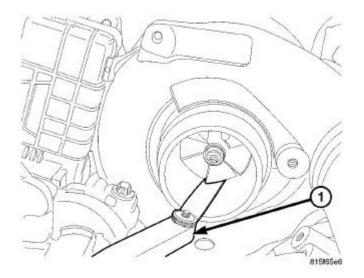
Measuring Turbocharger Radial Bearing Clearance Courtesy of CHRYSLER GROUP, LLC
